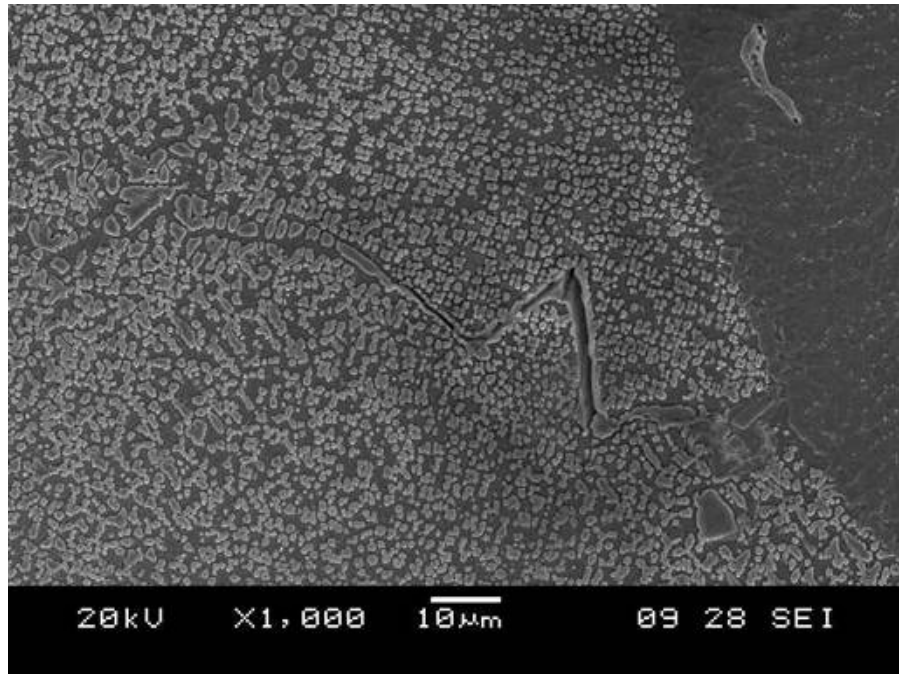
Grain boundary cracking in Inconel 738 weld HAZ
